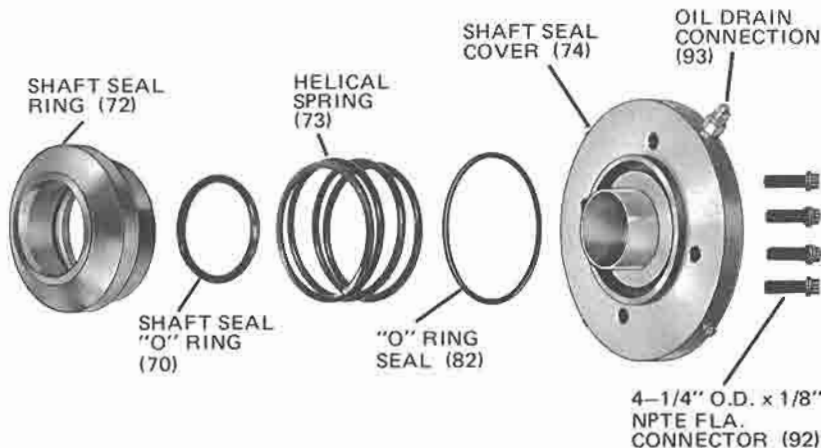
REAR LOW SPEED SHAFT SEAL ASSEMBLY
